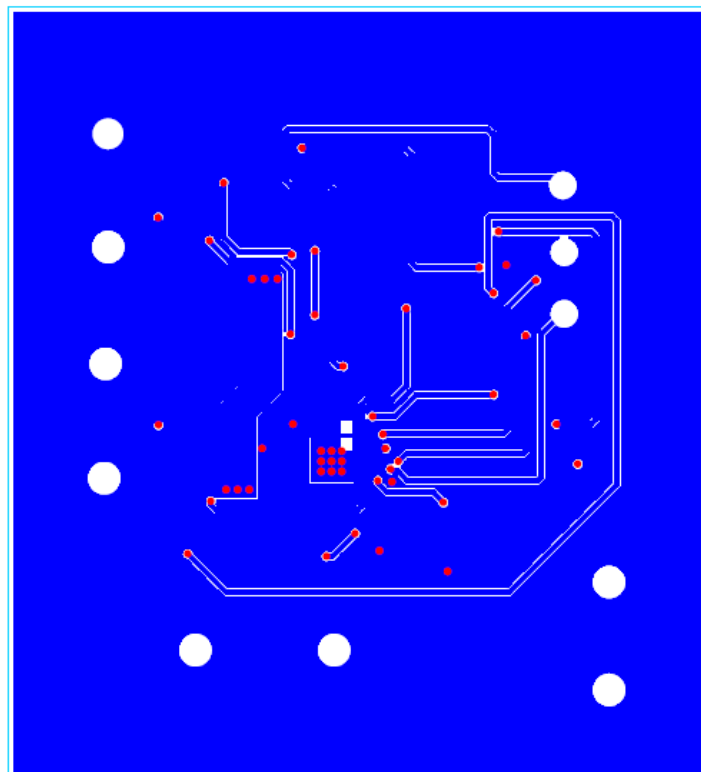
BOTTOM LAYER ETCH (MIRROR)
